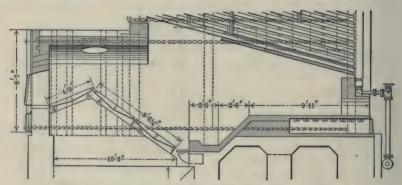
FURNACE FOR BURNING SAWDUST AND OIL.
